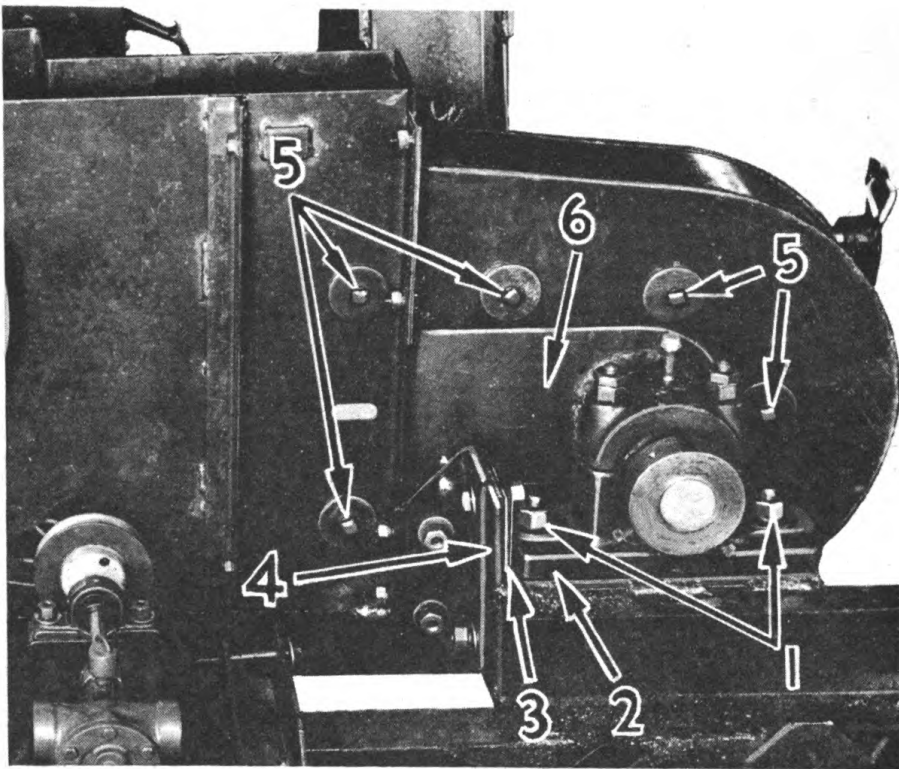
ADJUSTMENT OF DRIVE CHAIN BETWEEN
